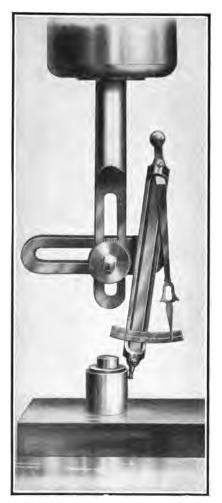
USING THE INDICATOR IN THE VERTICAL SPINDLE MILLER
